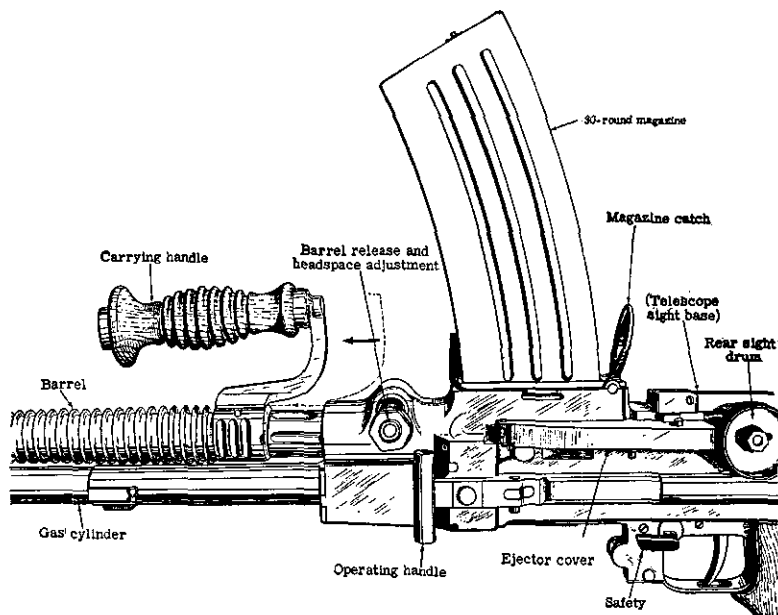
Close-up of Model 99 (1939) 7.7-mm light machine gun, showing method of withdrawing barrel.
